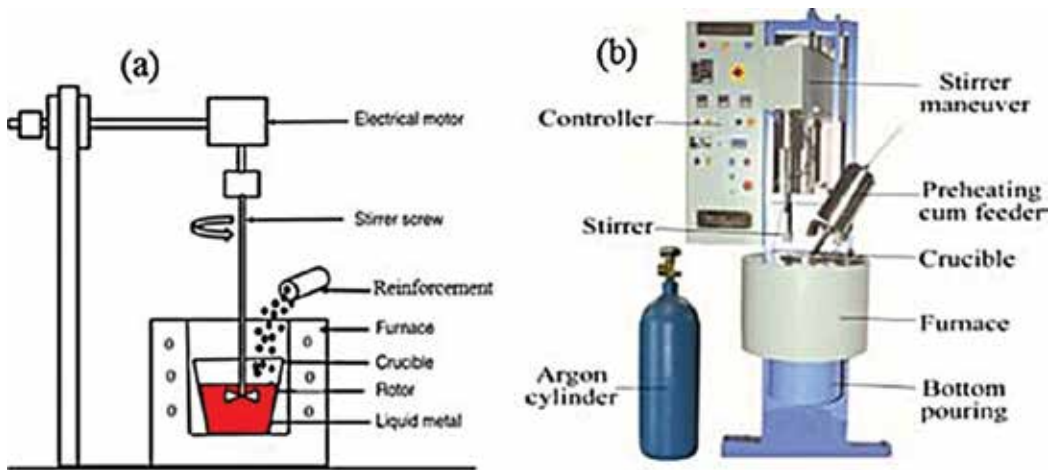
(a) A schematic stir casting set-up and (b) a complete stir casting facility [58].
